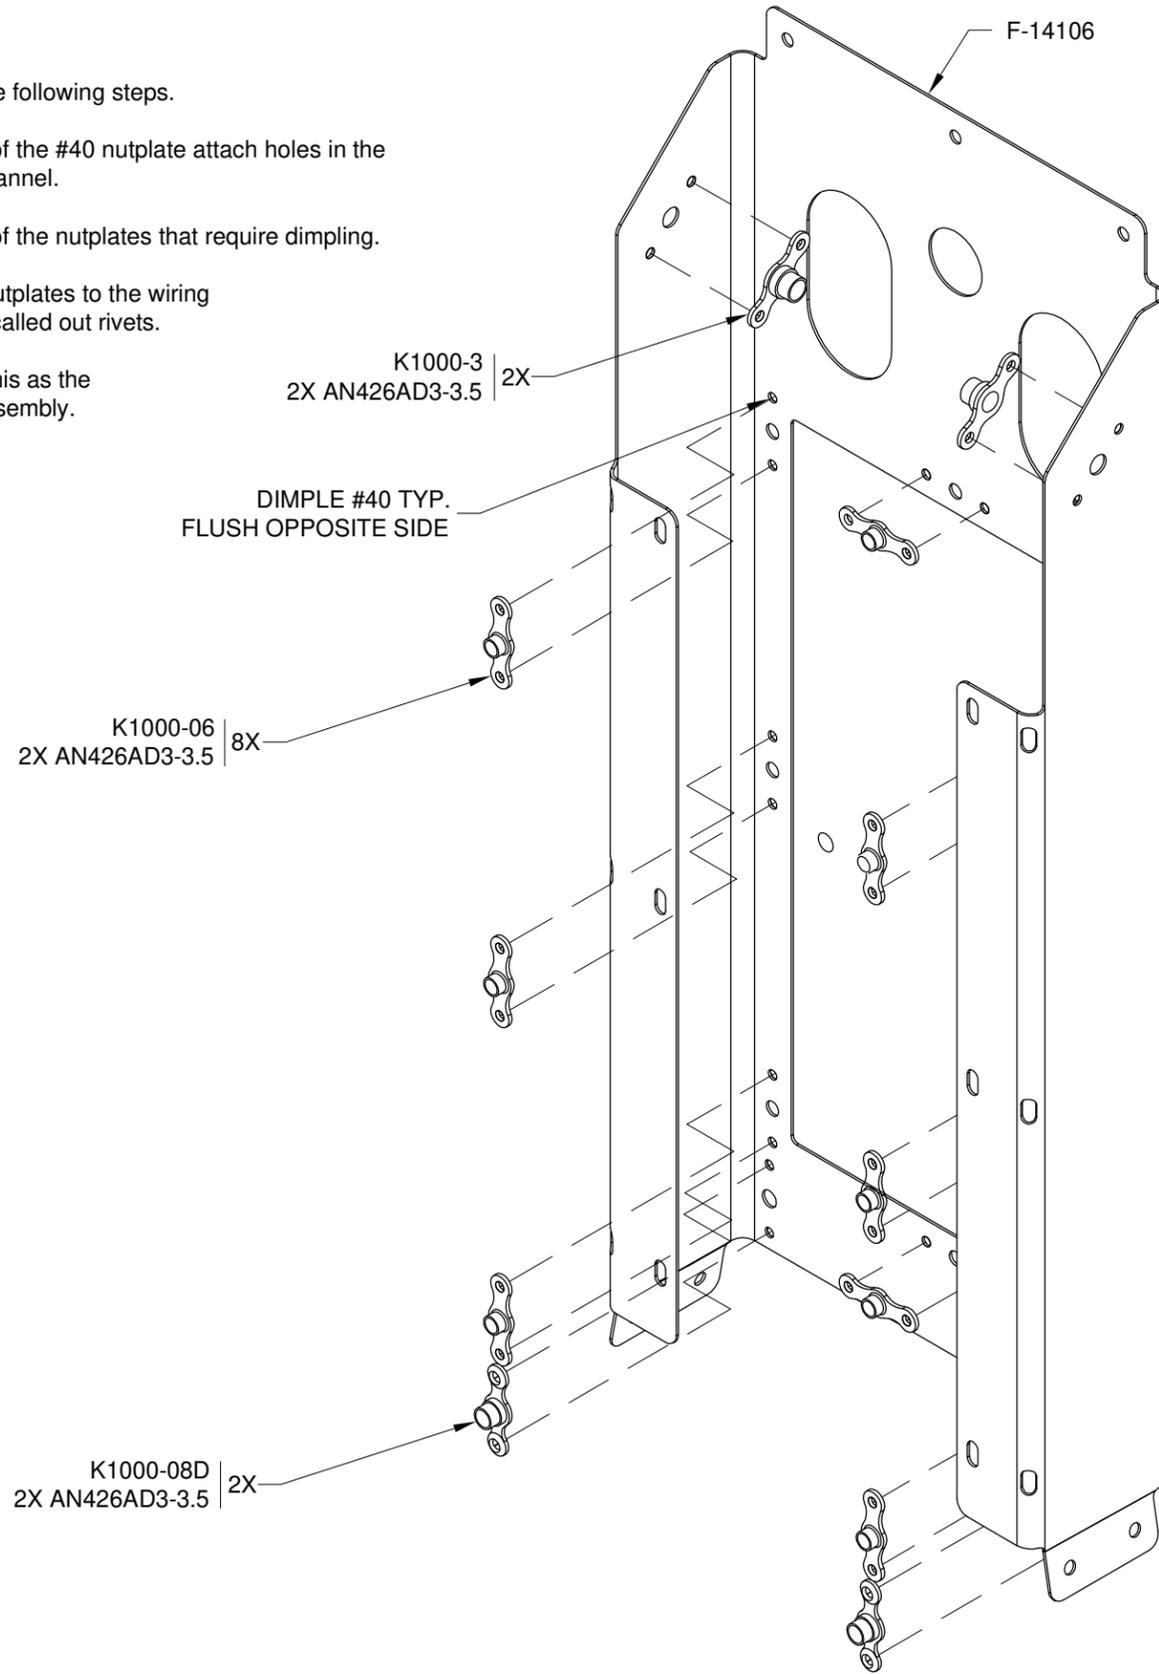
INSTALL WIRING CHANNEL NUTPLATES
